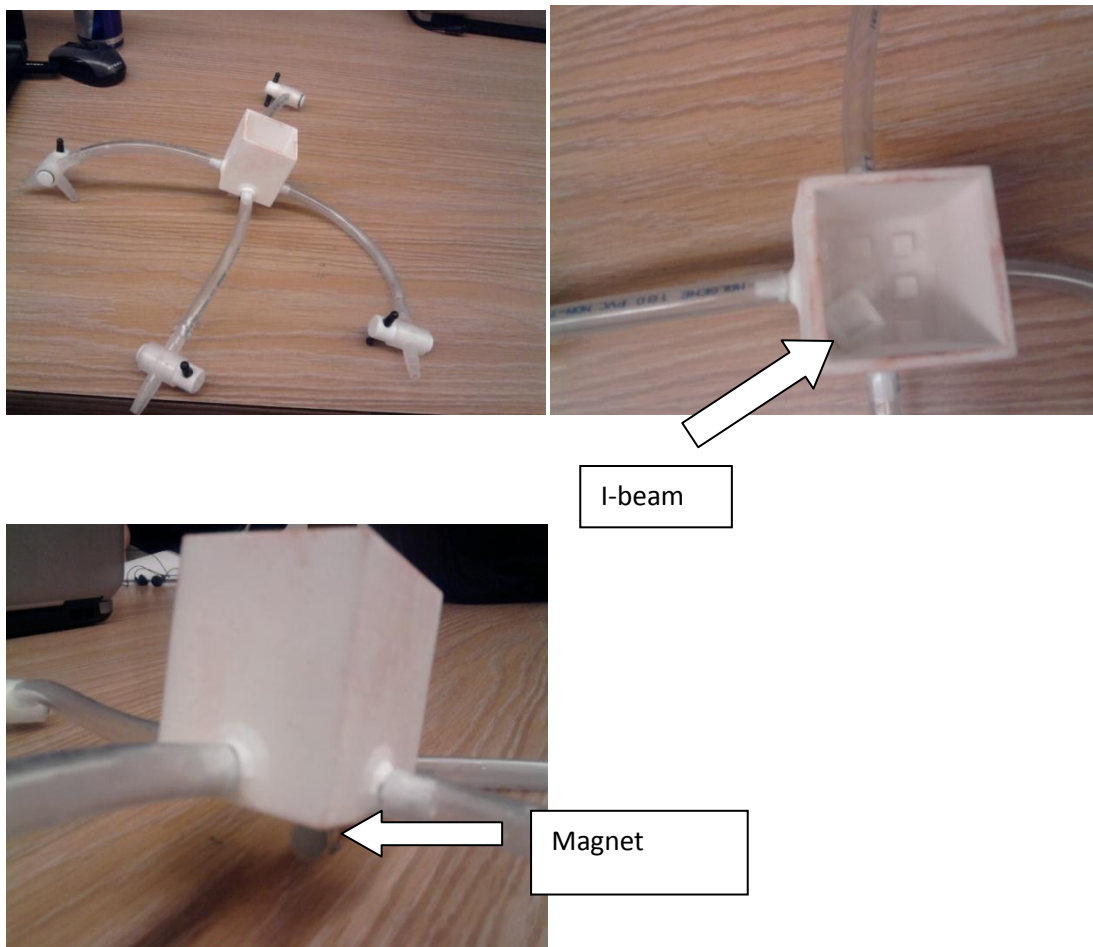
different views of the rapid prototyped part: *Photo by Salem C
